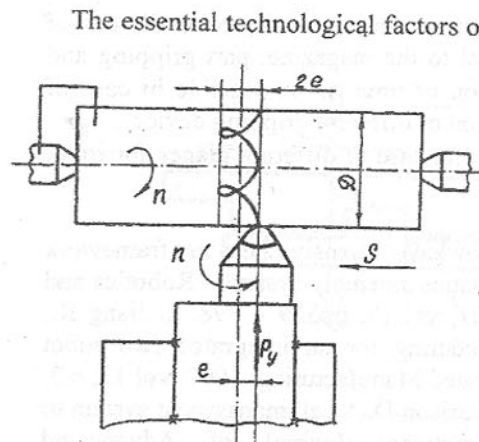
Principal diagram of a vibrate-burnishing of cylindrical parts
